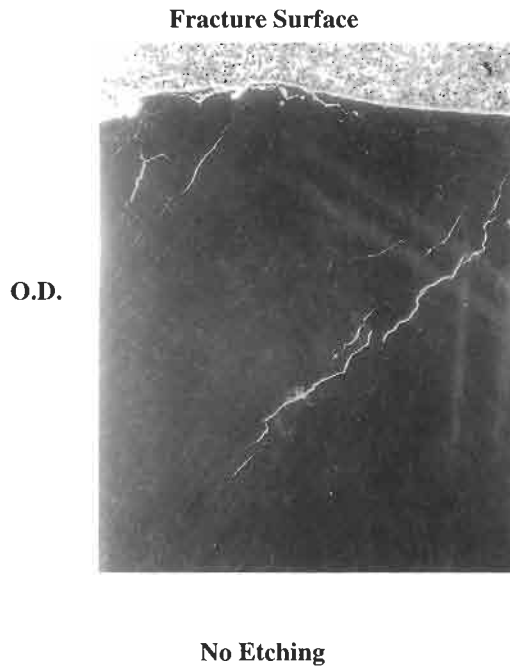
Metallographic section close to shaft fracture surface.
